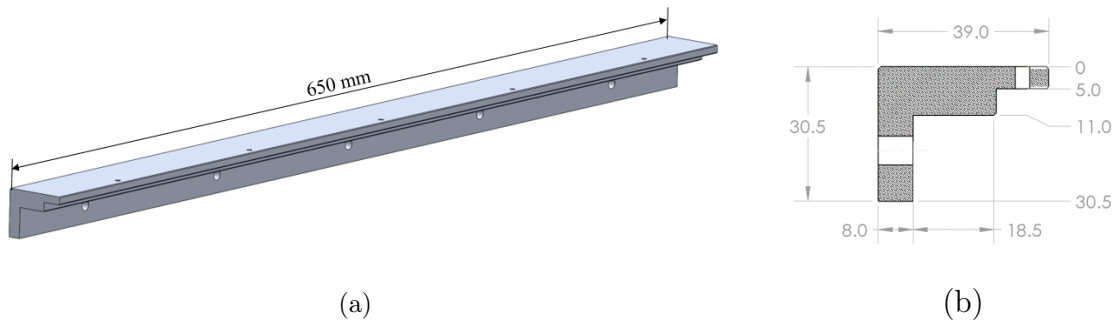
Aluminum spacer for stator and its critical dimensions. (a) CAD model of the aluminum spacer. (b) Cross-section of the spacer and its dimensions in millimeters.
